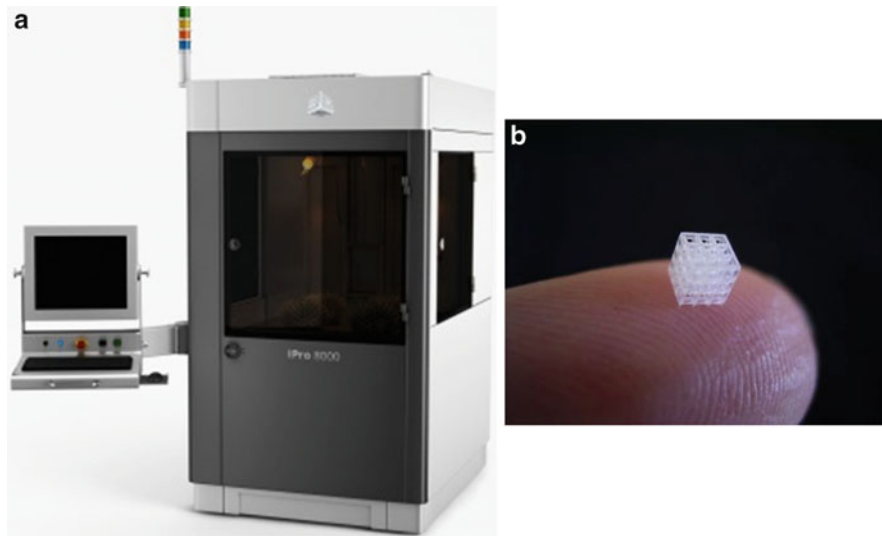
(a) Photo of a laser stereolithography 3D printer (model systems iPro™ 8000; size: 1.26 m × 2.2 m × 2.28 m). (b) A sample fabricated using stereolithography technique
